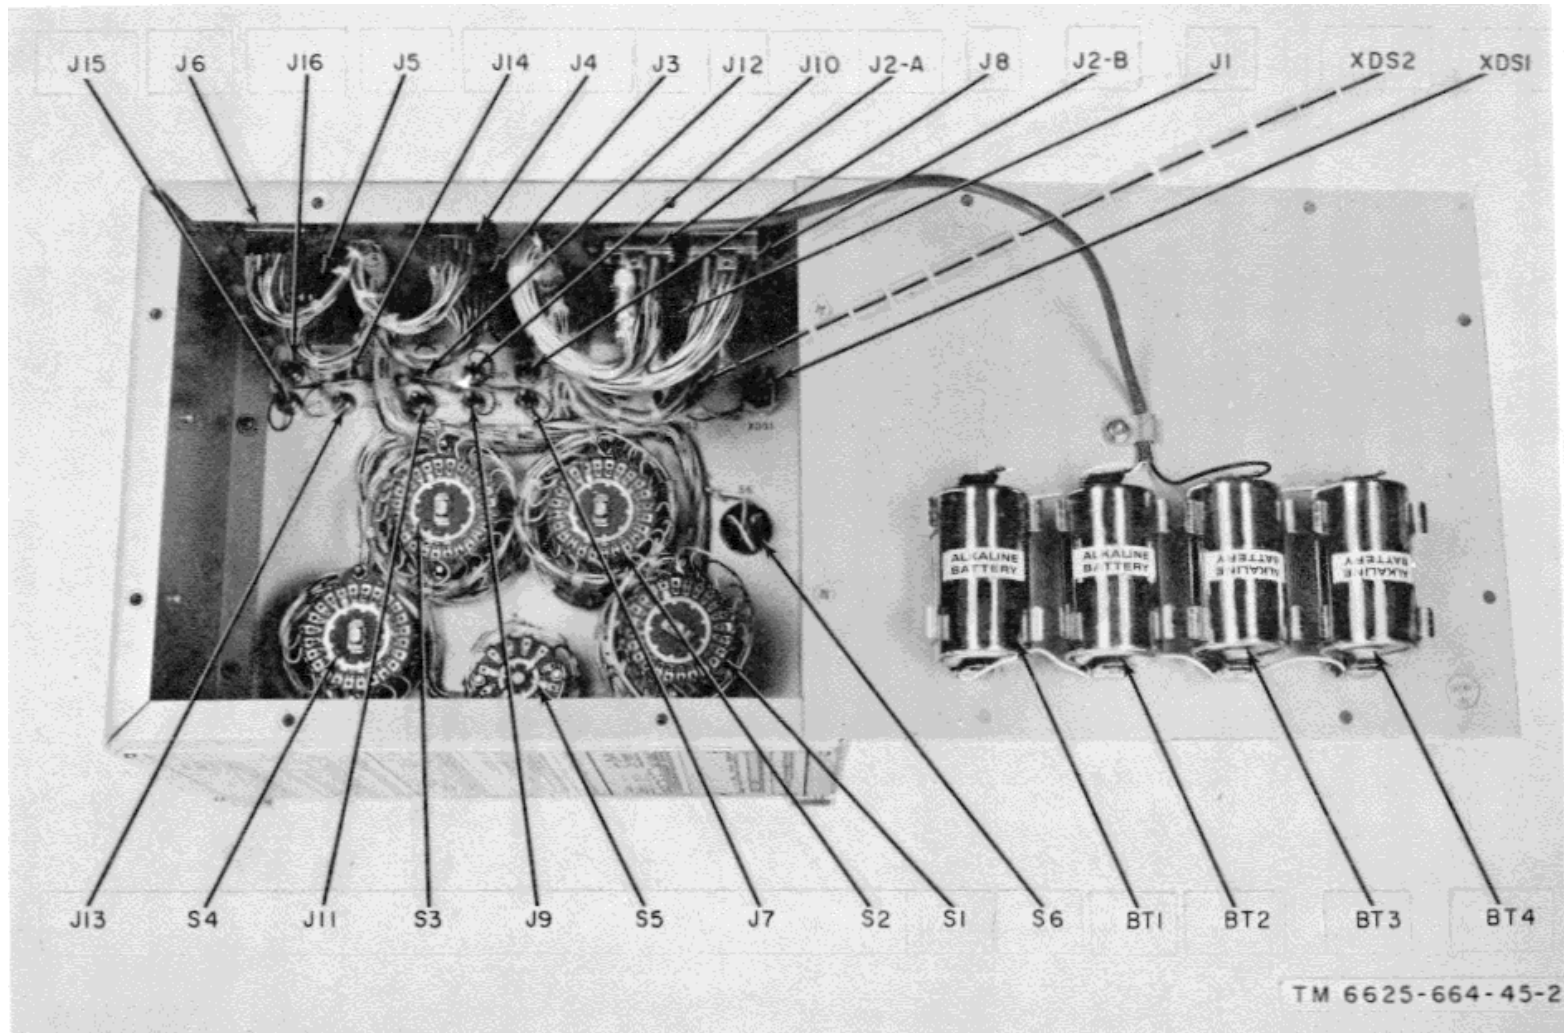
Test Set, Radar AN/APM-246, inside view, parts location
